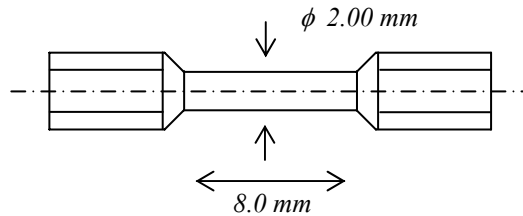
Geometry of the samples used for mechanical testing. The gauge length is 8.0 mm with a diameter of 2.00 mm. The specimen ends have M5 threads.
